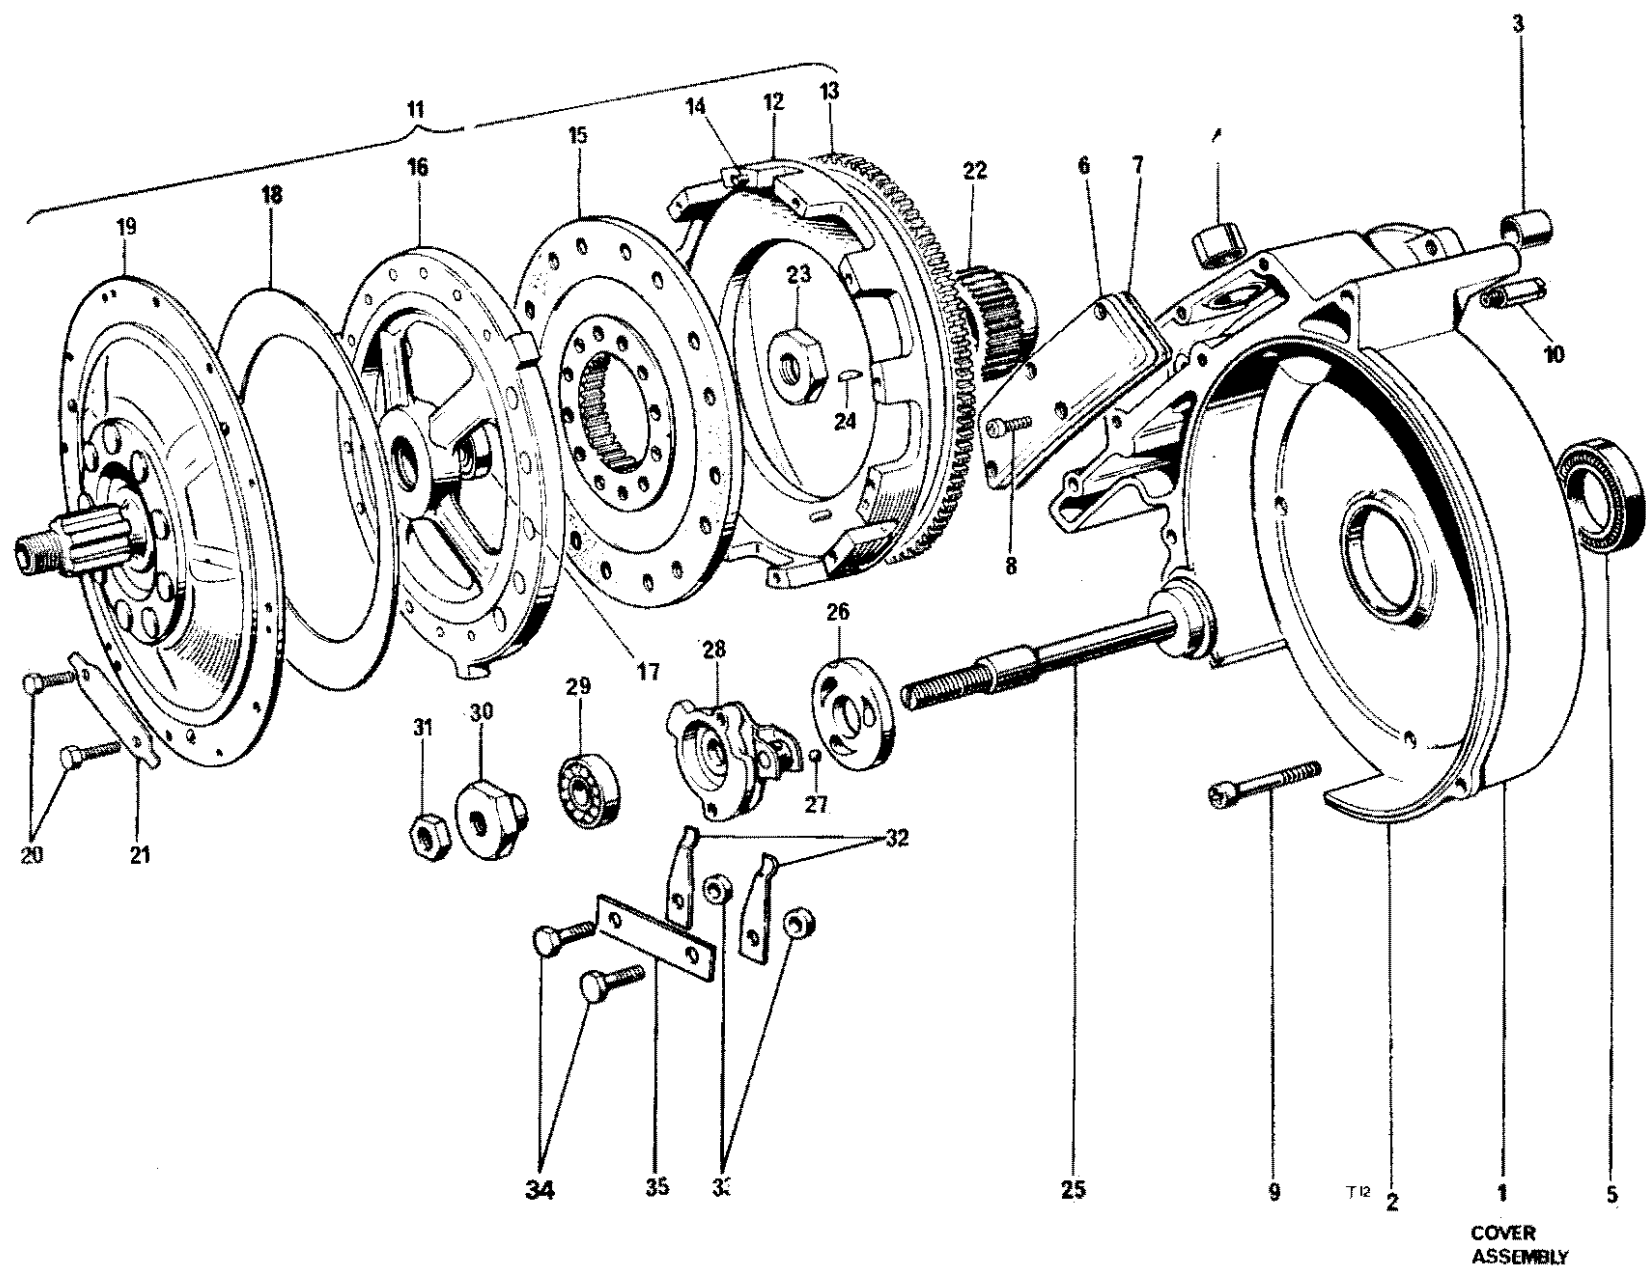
CLUTCH AND CLUTCH OPERATING MECHANISM
